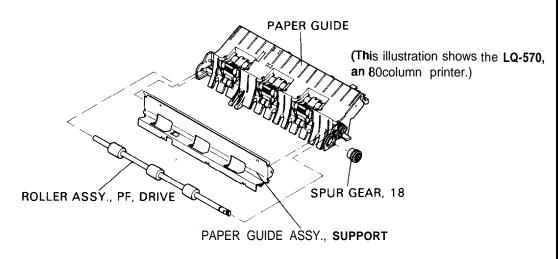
Removing the PAPER GUIDE ASSY., SUPPORT
